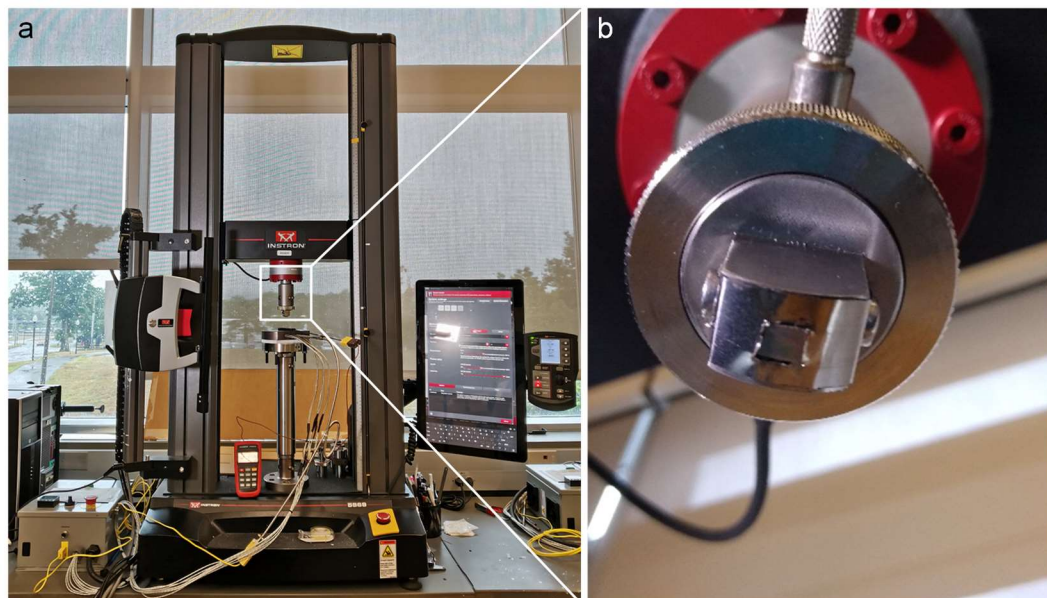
(a) Thermoplastic forming stage using Instron 5969 dual-column testing system with the force capacity up to 50 kN and heating temperature up to 600 °C. (b) A test sample mounted on the fixture.
